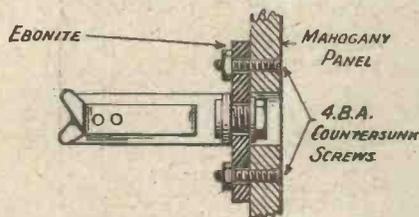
A hole of ample size should be drilled in the wooden panel before mounting the jack.
